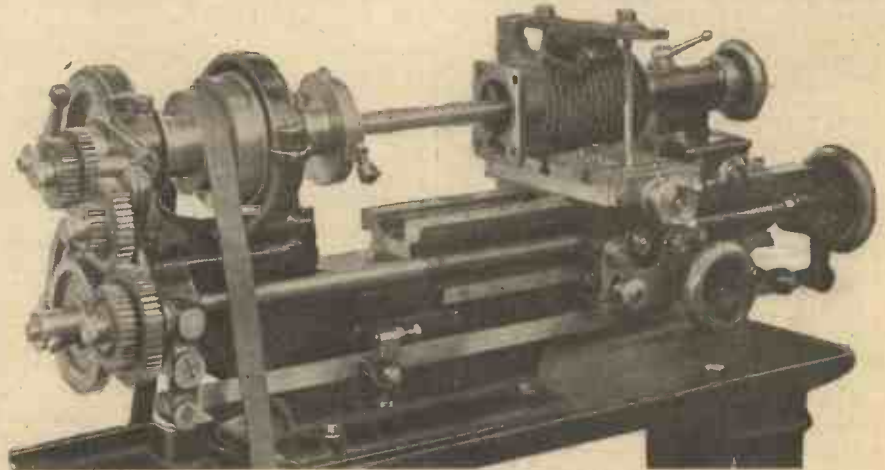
Reboring a motor cycle cylinder on a Drummond lathe.
